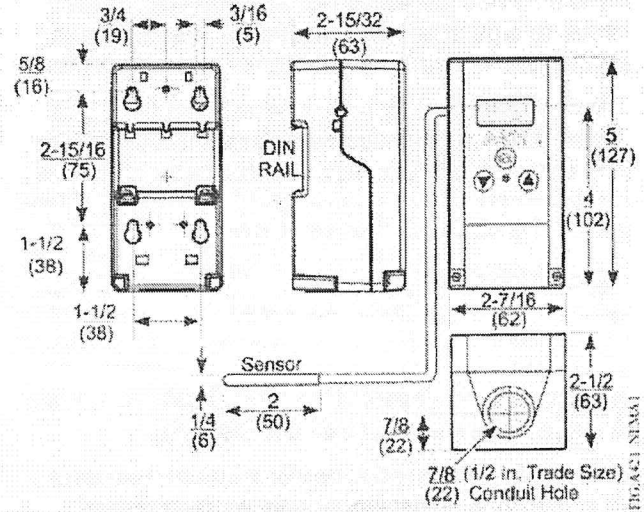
A421 Control with Type 1 (NEMA), IP20 Enclosure Dimensions, in. (mm)
